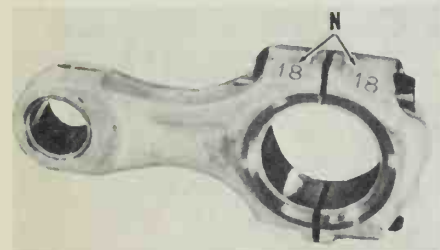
View of connecting rod and cap showing location of stamped numbers (N) which must be on same side after assembly.
